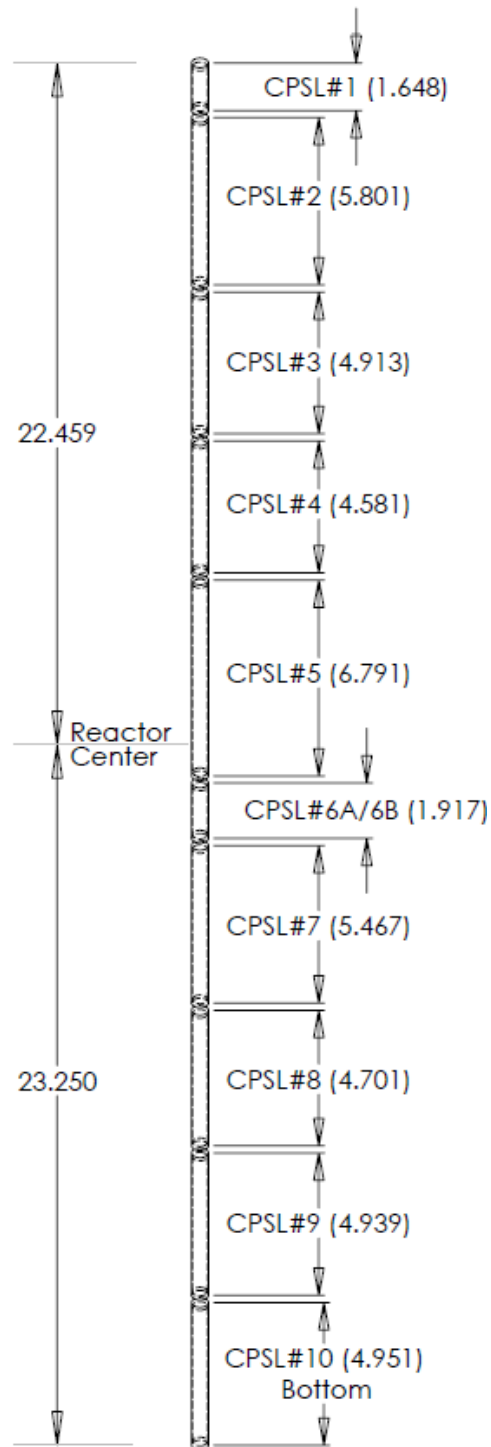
Capsule assembly schematic (lengths are in inches) [1].
